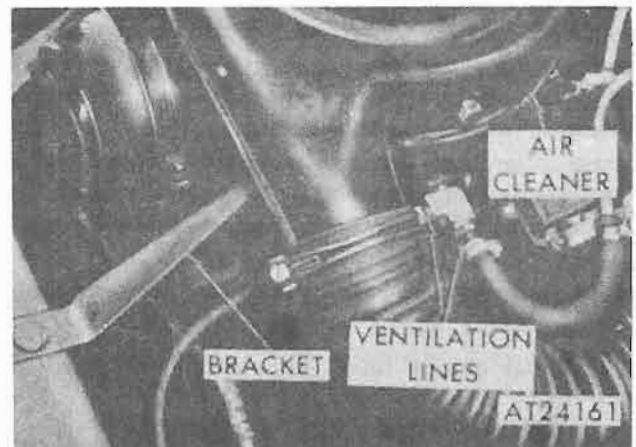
Removing or installing air cleaner on *M151A2, M825 and M718A1* vehicles.
